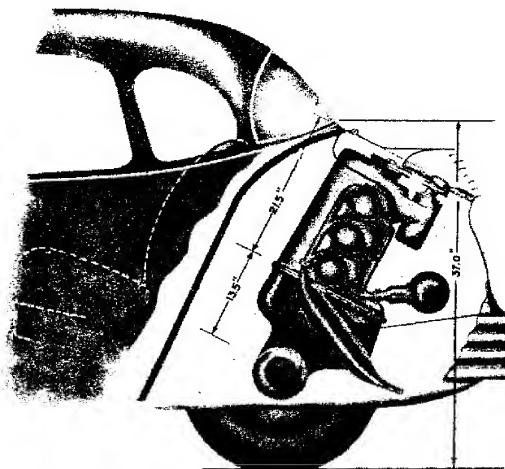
REAR ENGINE PASSENGER CAR OPPOSED 6-CYLINDER 75 HP - 3800 RPM 225 LBS. INSTALLED WEIGHT.
